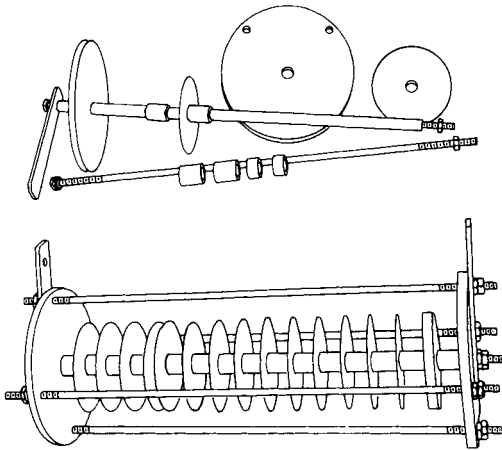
Assembly of a corrosion-test spool and specimens. (Mantell, ed., Engineering Materials Handbook, McGraw-Hill, New York, 1958.)
